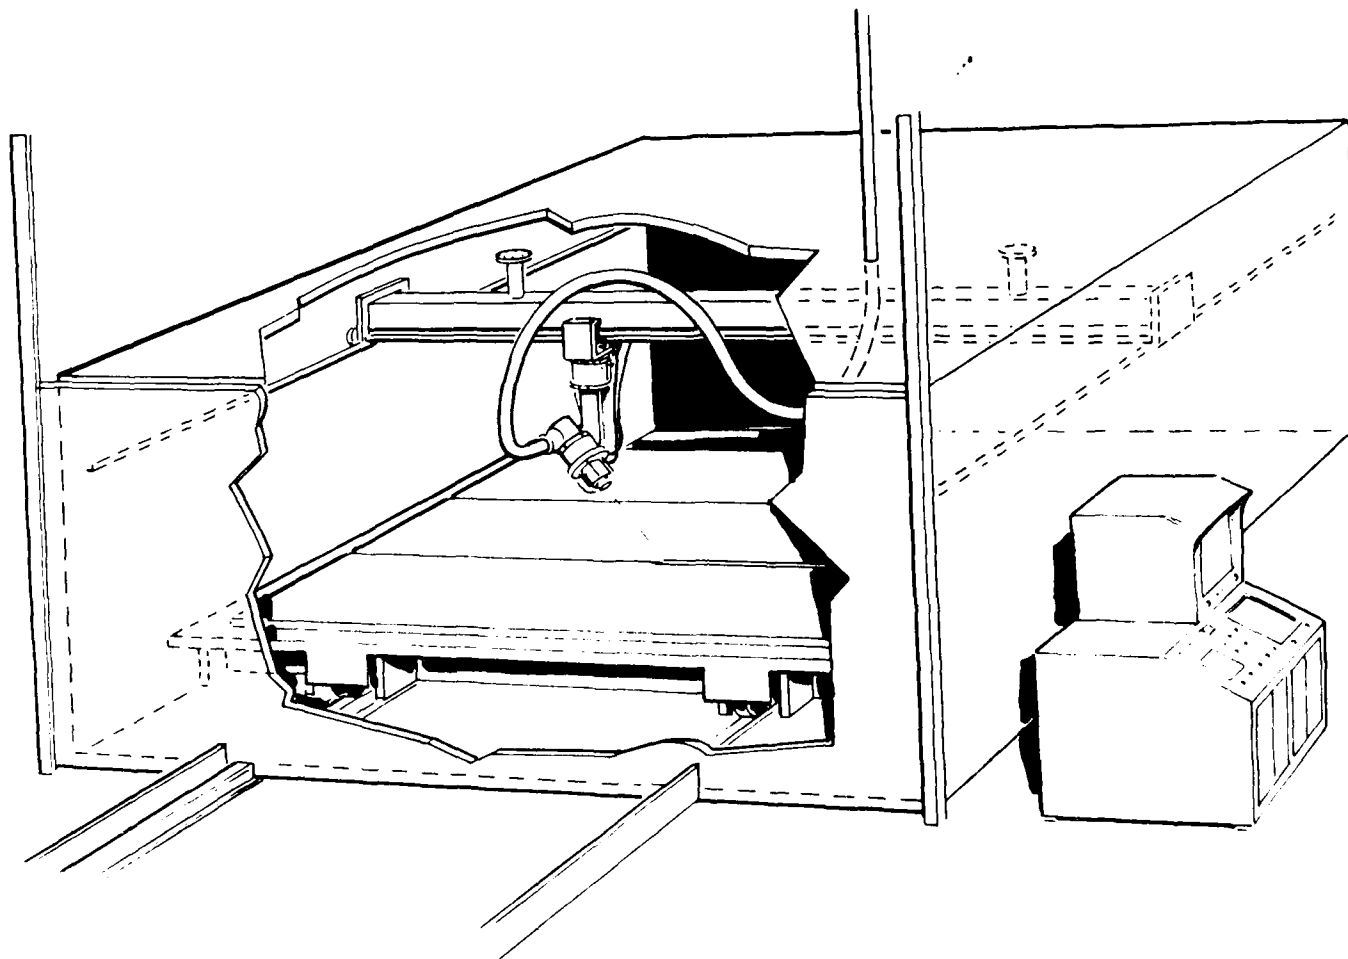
LARGE CHAMBER EB WELDING
